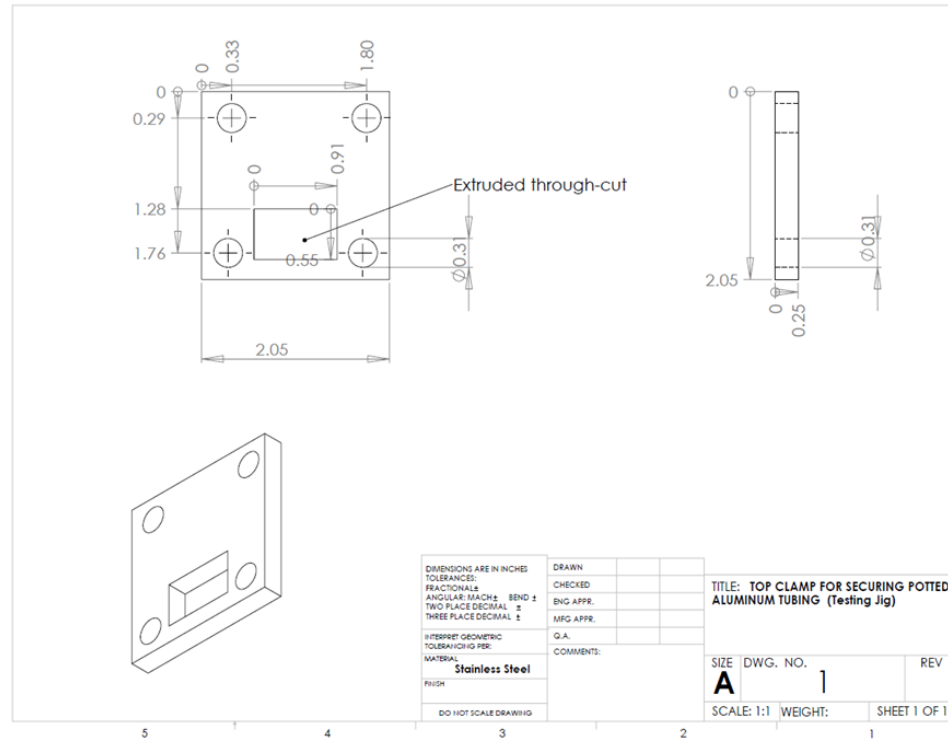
Engineering Drawing of Securing Plates used for Bending Tests
